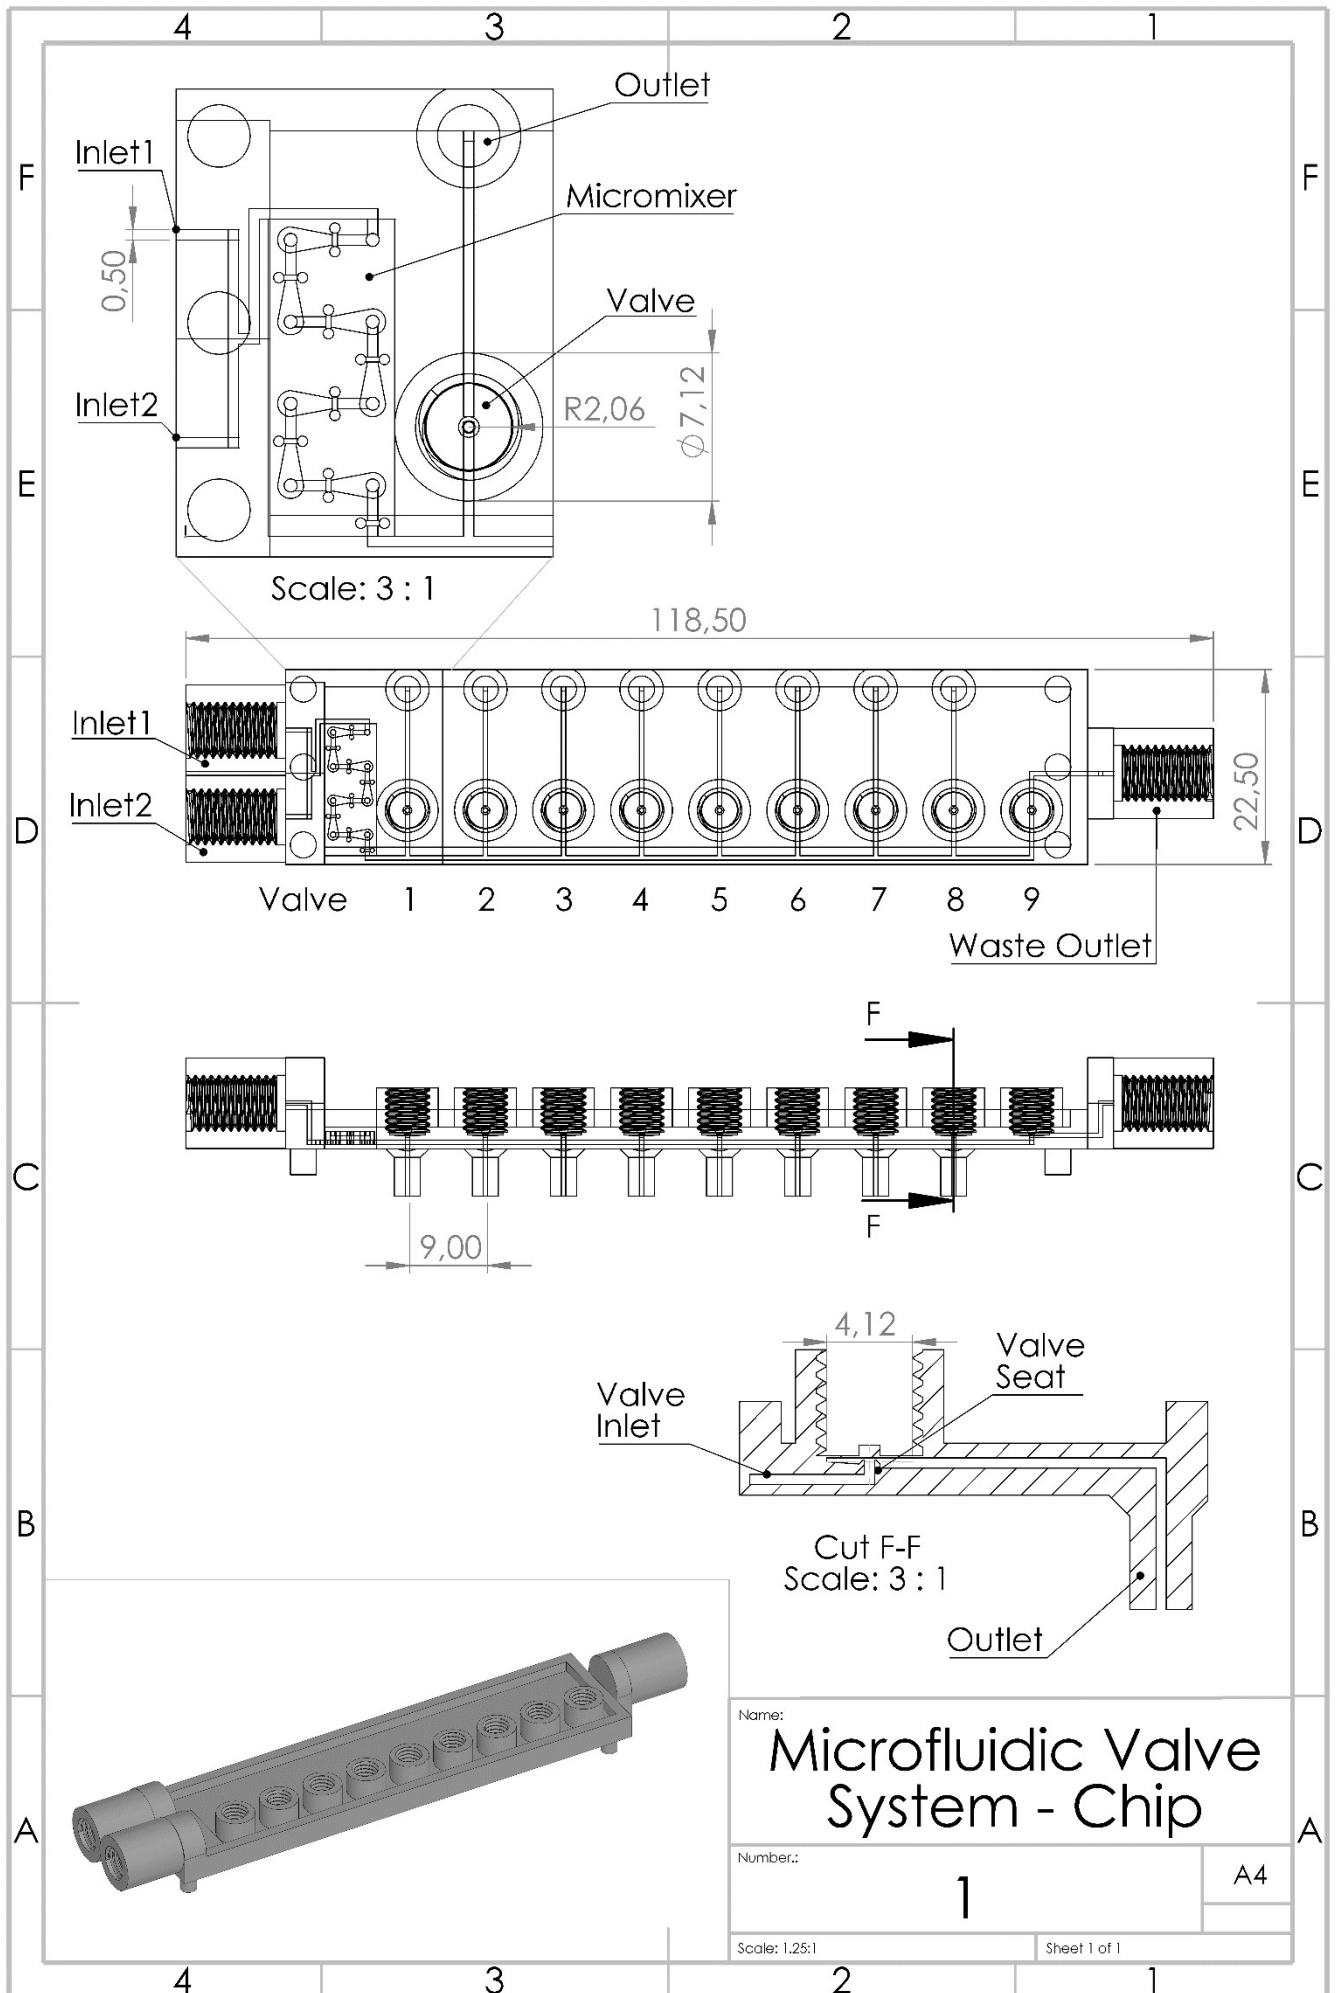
Technical drawings of the 3D-printed microfluidic valve system.
